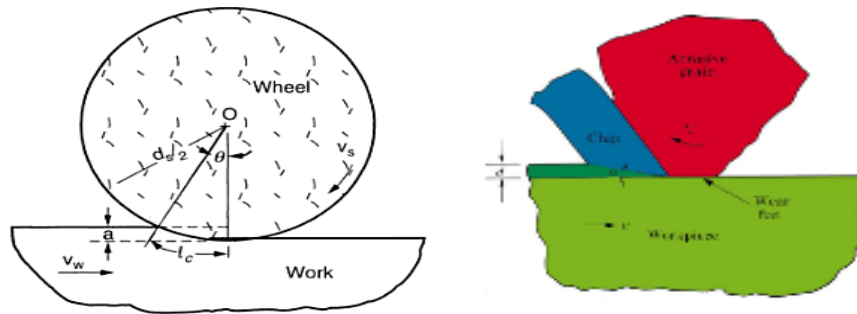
(a) wheel-workpiece (b) grain-workpiece interaction [13]
